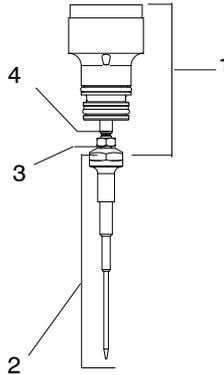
Piston/Cartridge Assembly and Needle Assembly
